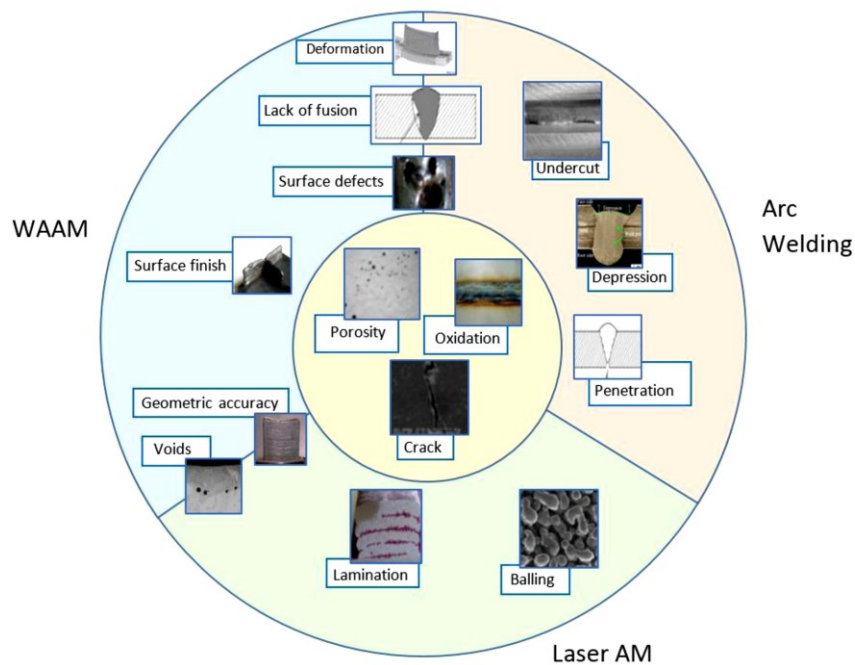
Different types of defects in WAAM, Laser AM, and Arc welding [16].
